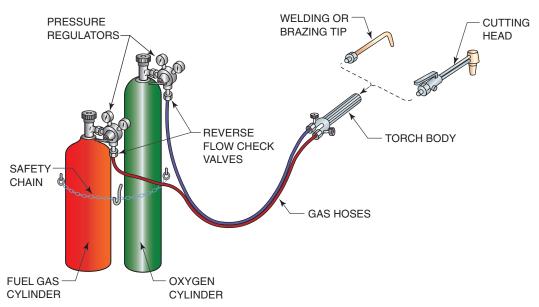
Oxyfuel welding and cutting equipment.
